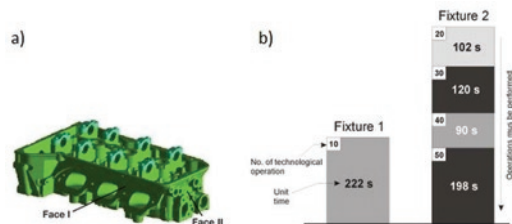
Engine part : a) general schematic view of the product, b) structure of the technological process [28].
